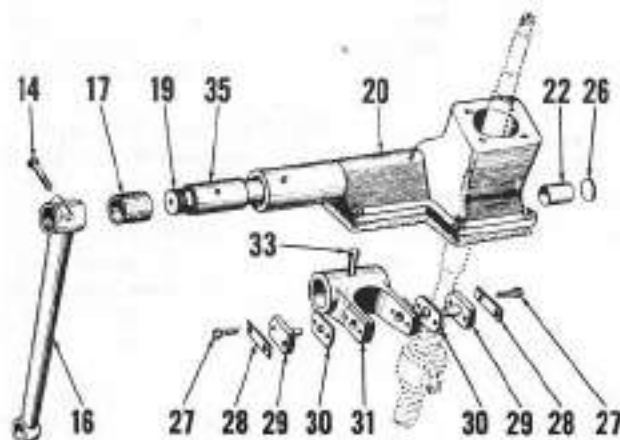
Exploded view of steering gear housing, cross shaft and steering arm assembly used on models 880 and 990.
